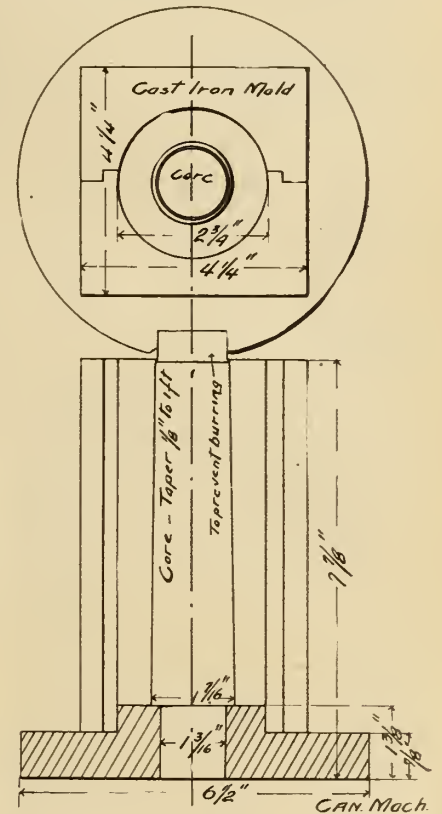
Mold for Metallic Cylinder from which Sets of Valve Stem Packing is Formed.
